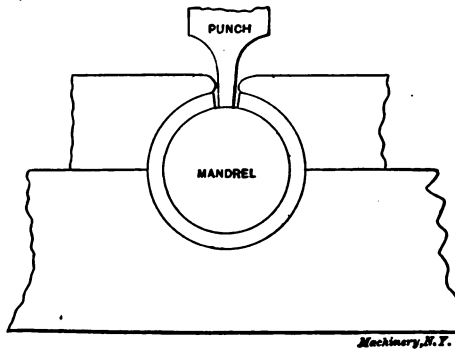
Forming a Bow Spring with Ends which nearly meet.
